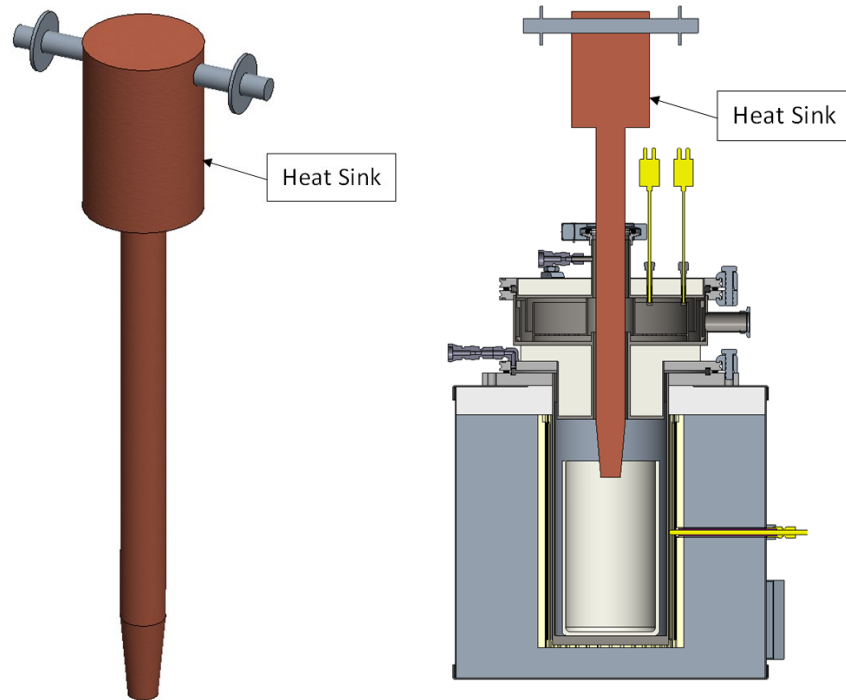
Chill Rod – Isometric view (left) and section view installed in condenser (right)
